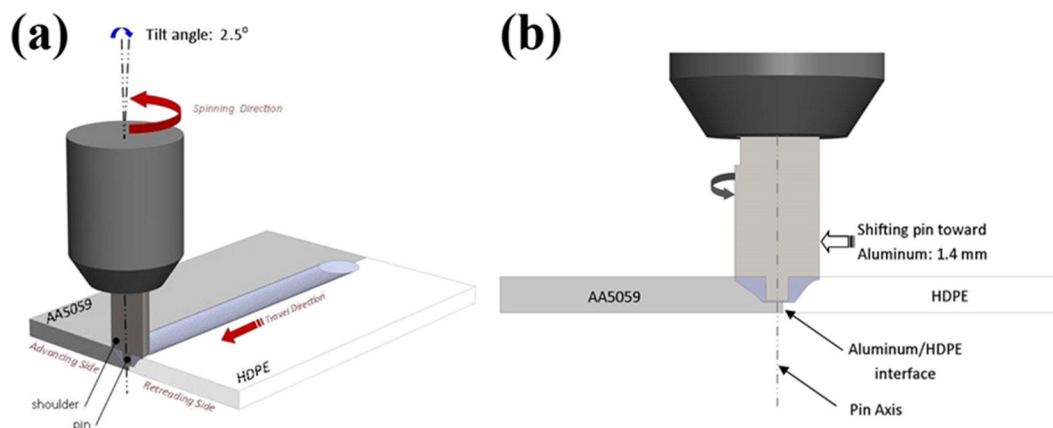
Schematic of the process: (a) friction stir welding in butt-joint configuration and (b) position of the rotating pin in present study.
